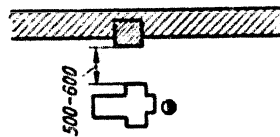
Clearance from Lateral Side of Machine Tool to Column
